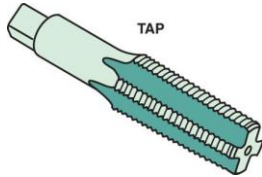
A typical bottoming tap used to create threads in holes that are not open, but stop in a casting, such as an engine block.
